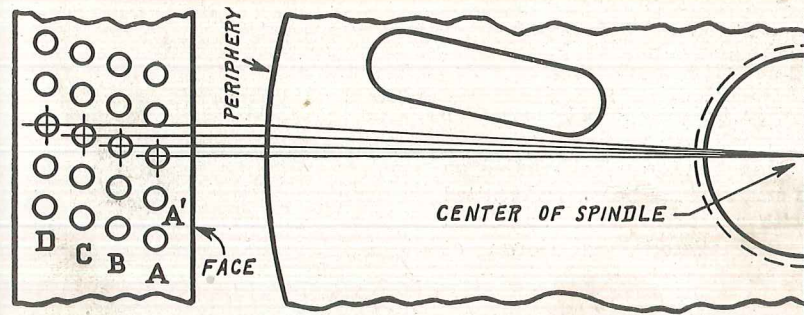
A. Drawing Showing a Section of the Indexing Face Plate
